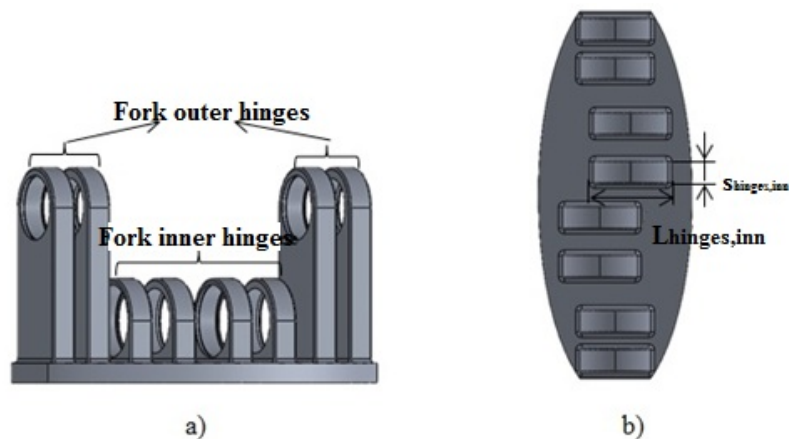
a) View of the lower base. b) View from the top of the lower base where there are highlighted the dimensions to design.
